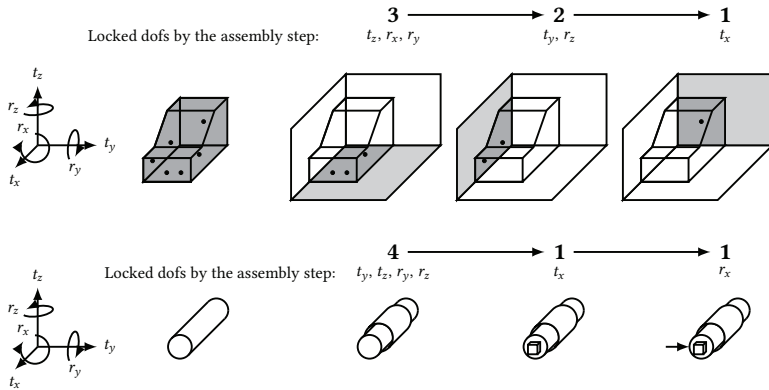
Commonly used Locating Schemes: 3-2-1 Locating Scheme of a planar Part (top) and 4-1-1 Locating Scheme of a cylindrical Part (bottom) according to [SJ99, Wei15b]
